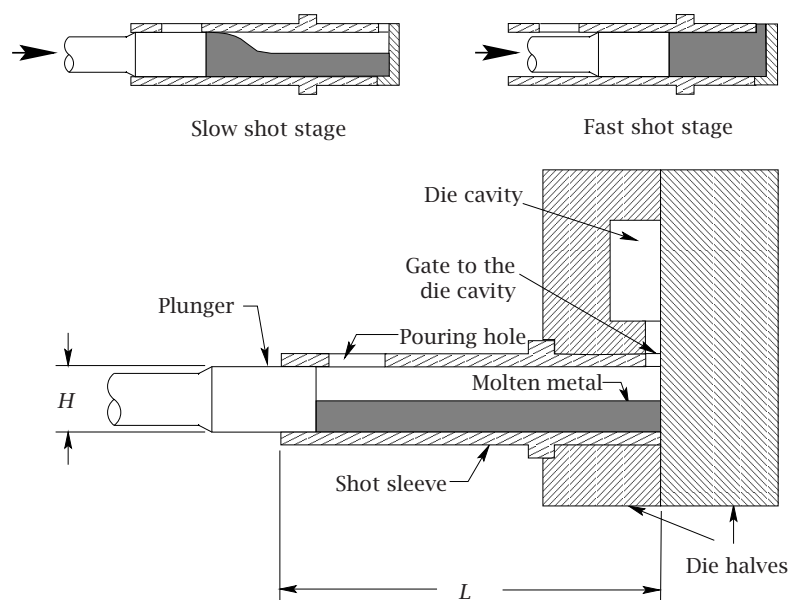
Schematic representation of a die casting machine with horizontal cold chamber.
